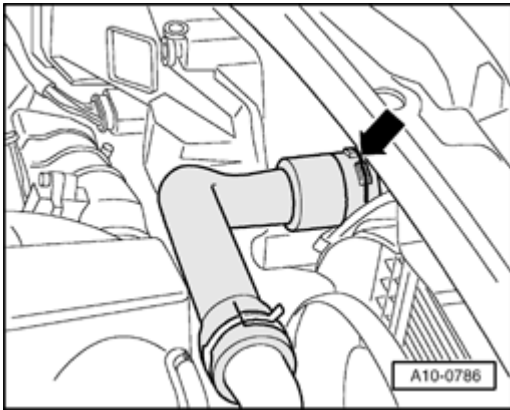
Disconnecting Top Coolant Hose From Radiator
